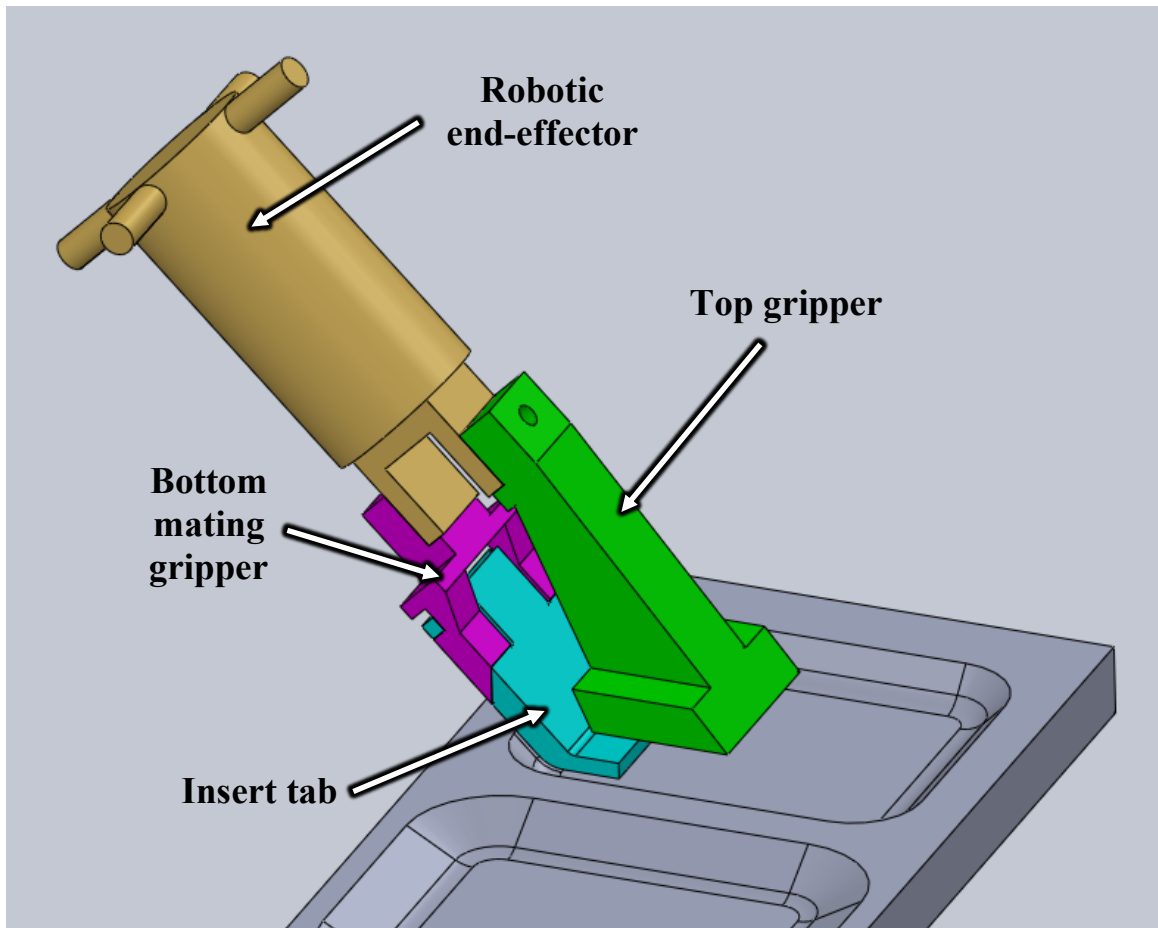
Insert gripper CAD model consisting of robotic end-effector, insert tab, bottom mating gripper, and top gripper
